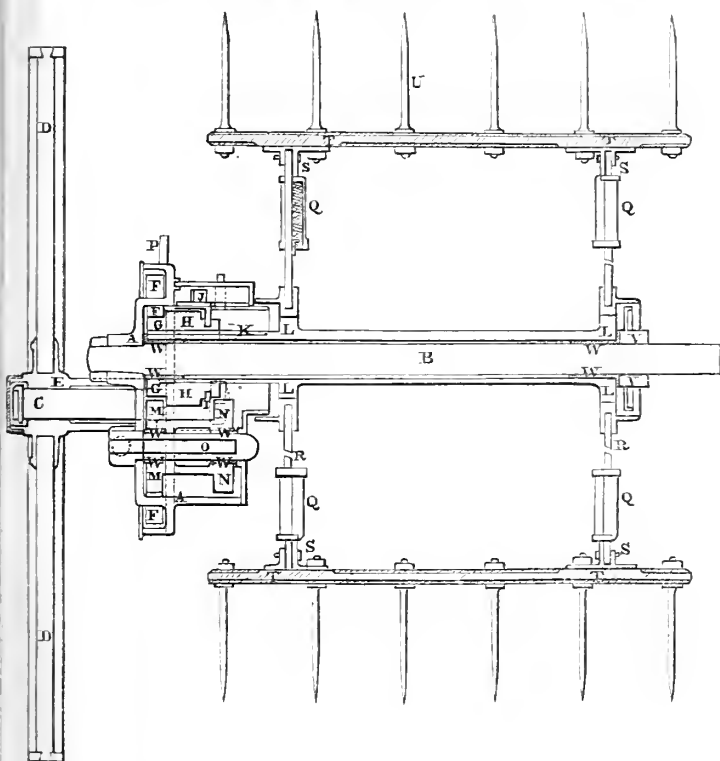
Side View of Messrs. Ashby, Jeffery, and Luke's Hay-making Machine, No. 201.
